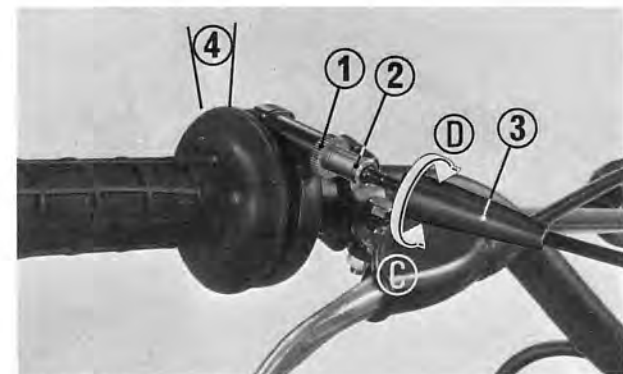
(1) Lock nut (2) Adjuster (3) Dust cover (4) Grip free play
